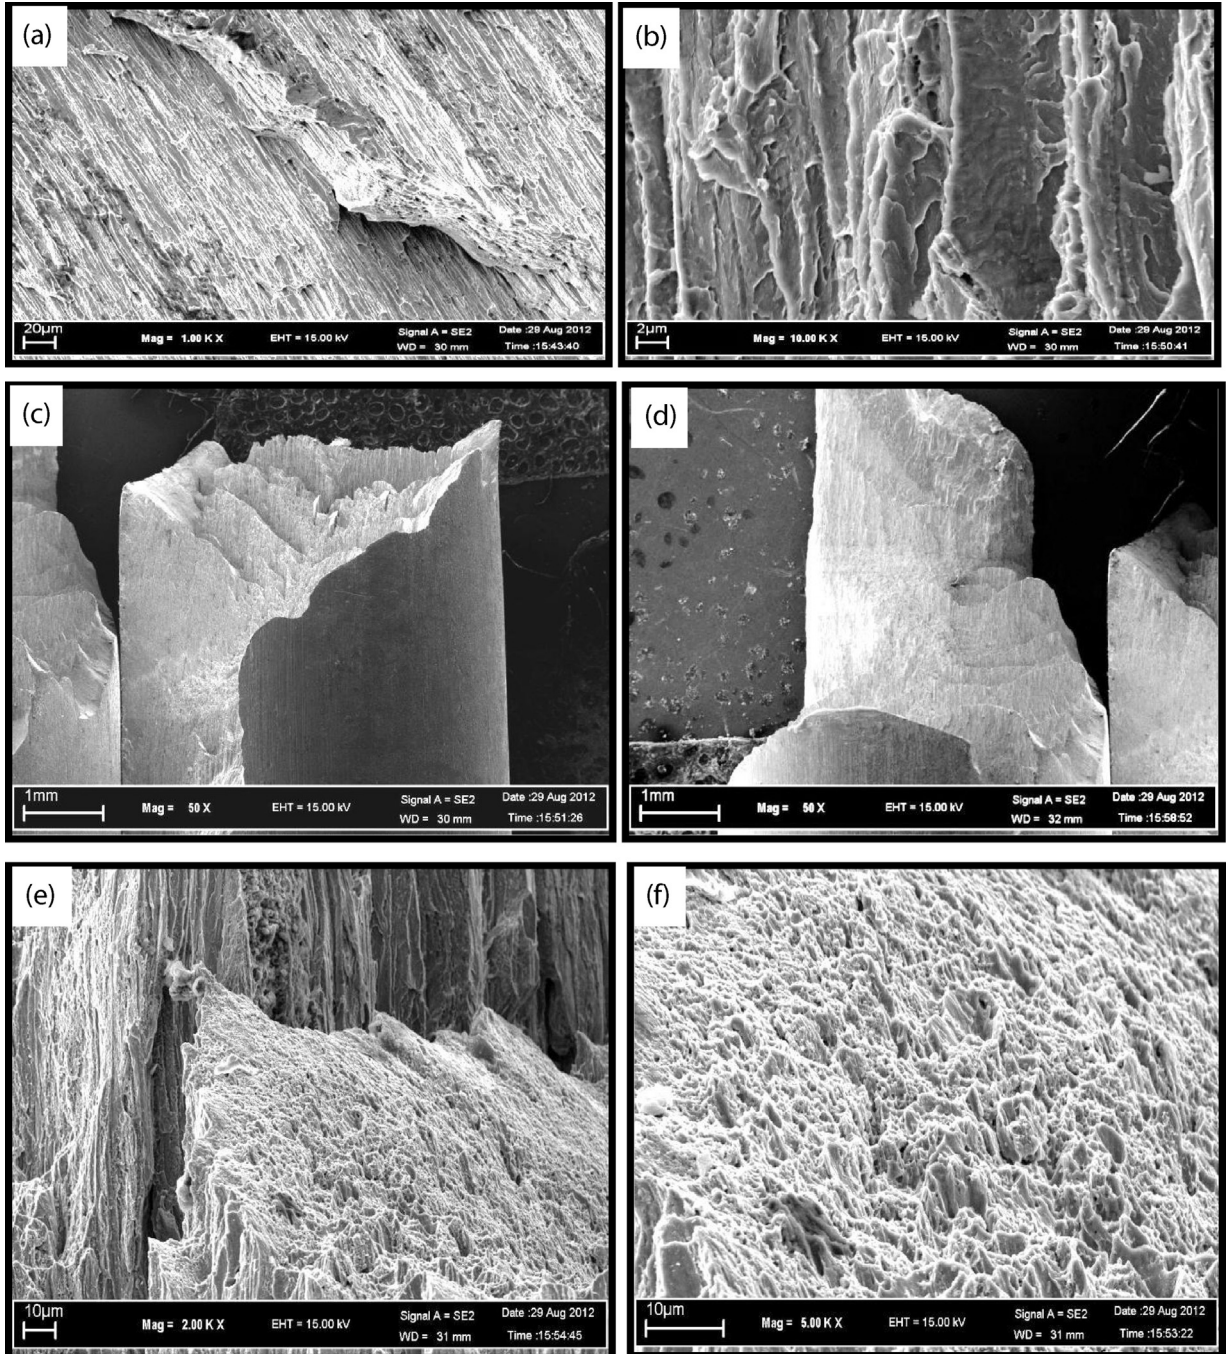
(a) and (b) The fracture surface of the failed sample (as received conditions) at different magnifications, (c) and (d) the fracture surface of the failed sample (baked) after tensile testing and (e) and (f) the fracture surface of the failed sample (after tensile testing) at different magnifications.
